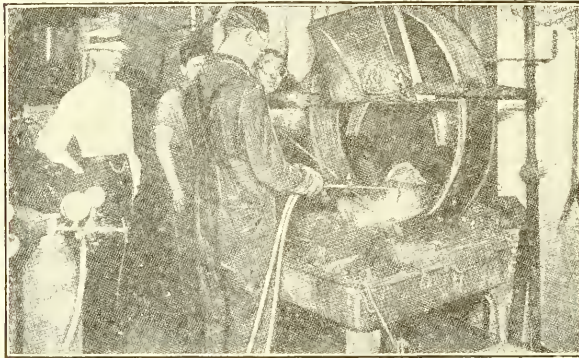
Preheating and Welding Large Truck Tire.
